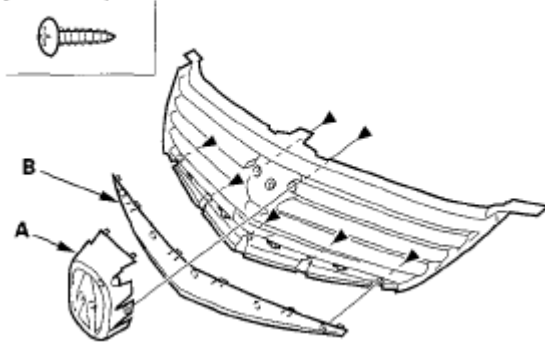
Identifying Emblem Base, Upper Grille Molding And Upper Grille
